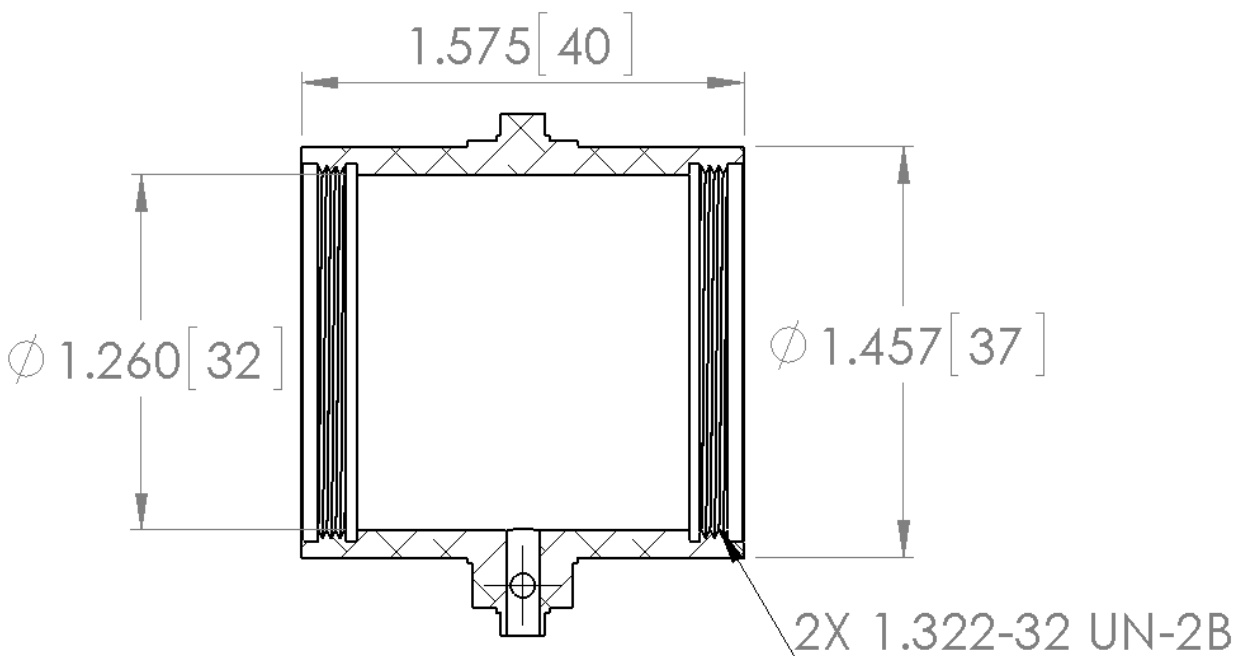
Cross section view of the enclosure. The two end caps screw into the threaded regions at either end. The bosses on the top and bottom of the enclosure interface with the gimbal motor and bearings. Dimensions are in inches [millimeters].
